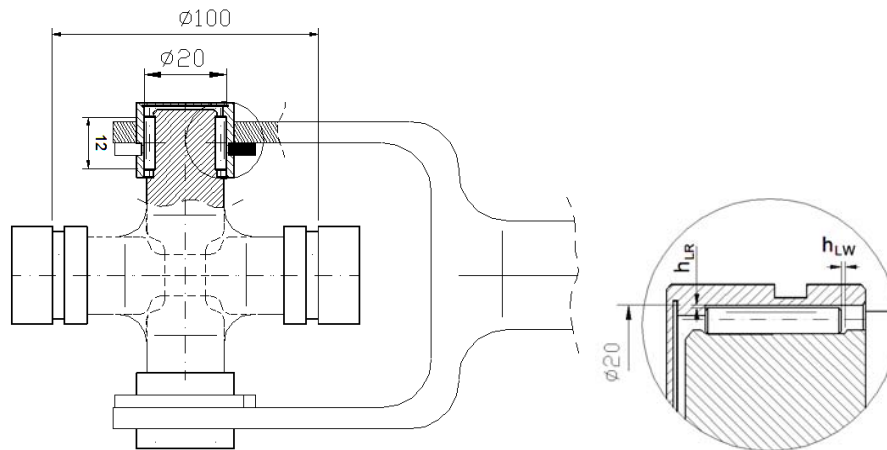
Universal joint (Bałchanowski, 2014a): a) general view, b) cross section through cross bearing, view of radial clearance h_{LR} and axial clearance h_{LW} .
